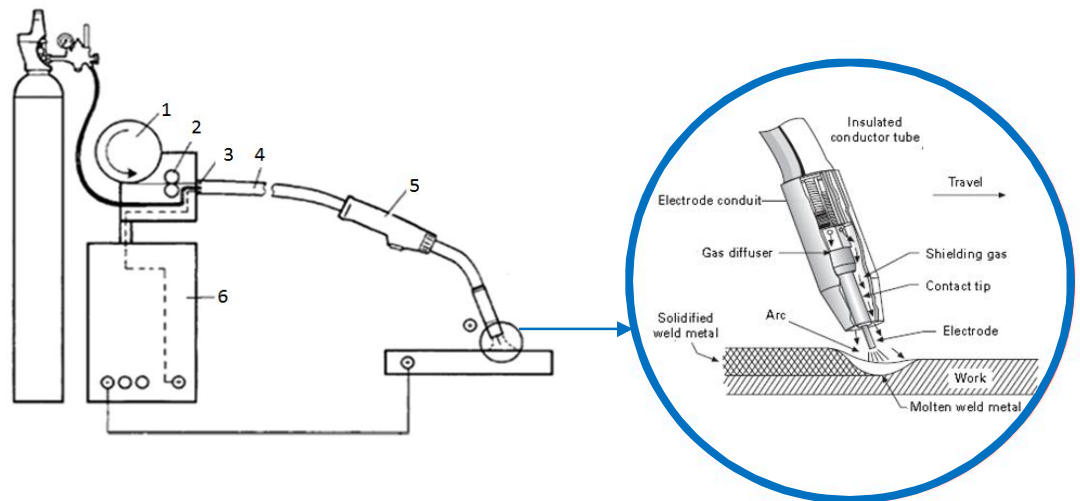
GMAW process equipment: (1) Reel or drum, (2) Drive rollers (3) Flexible conduit, (4) Hose package, (5) Welding gun, (6) Power source [2, 9]
